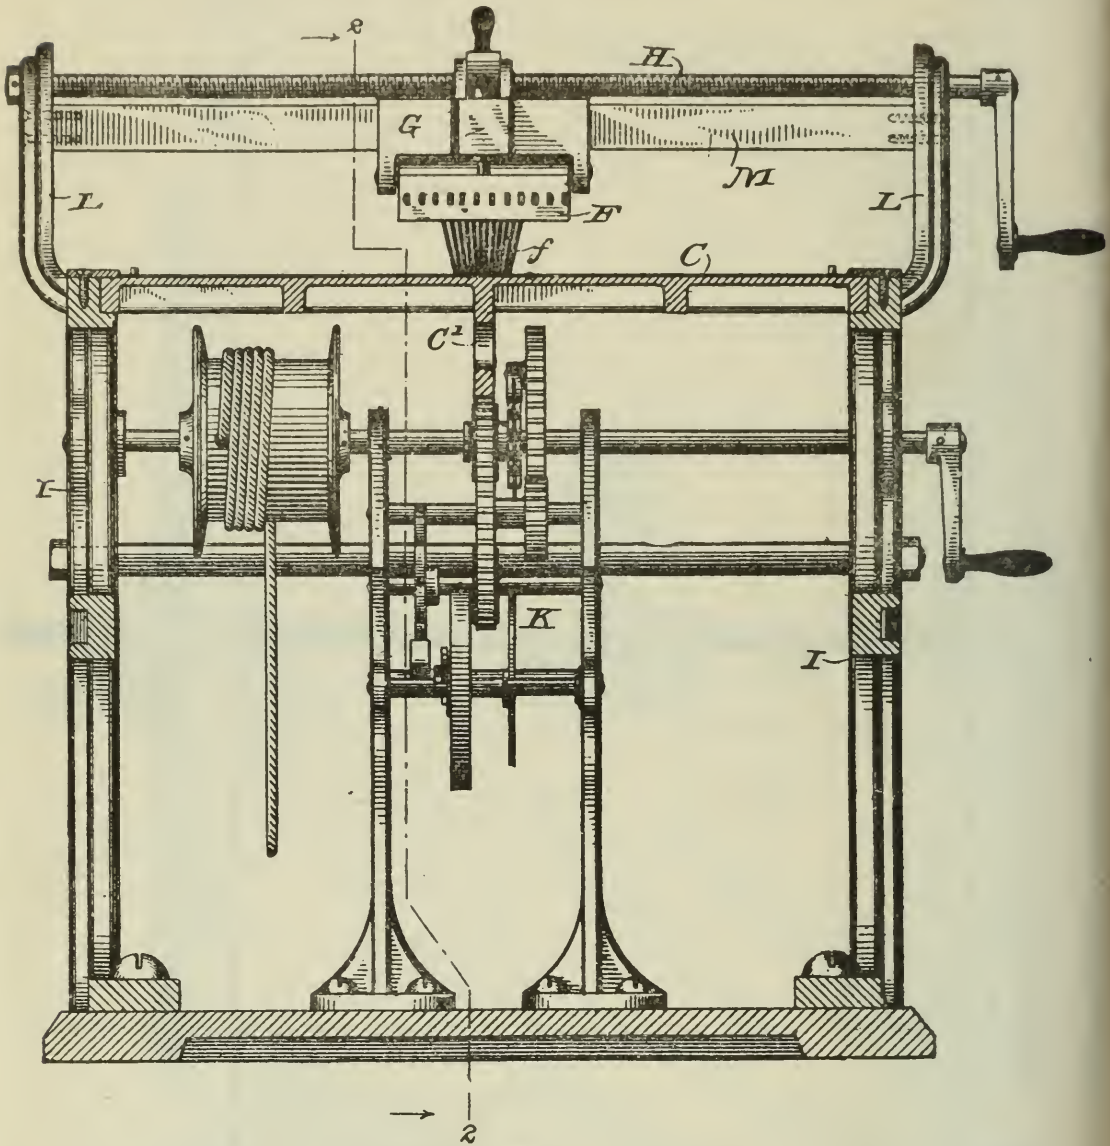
Device for Reciprocating Motion of Transmitting and Receiving Apparatus.
